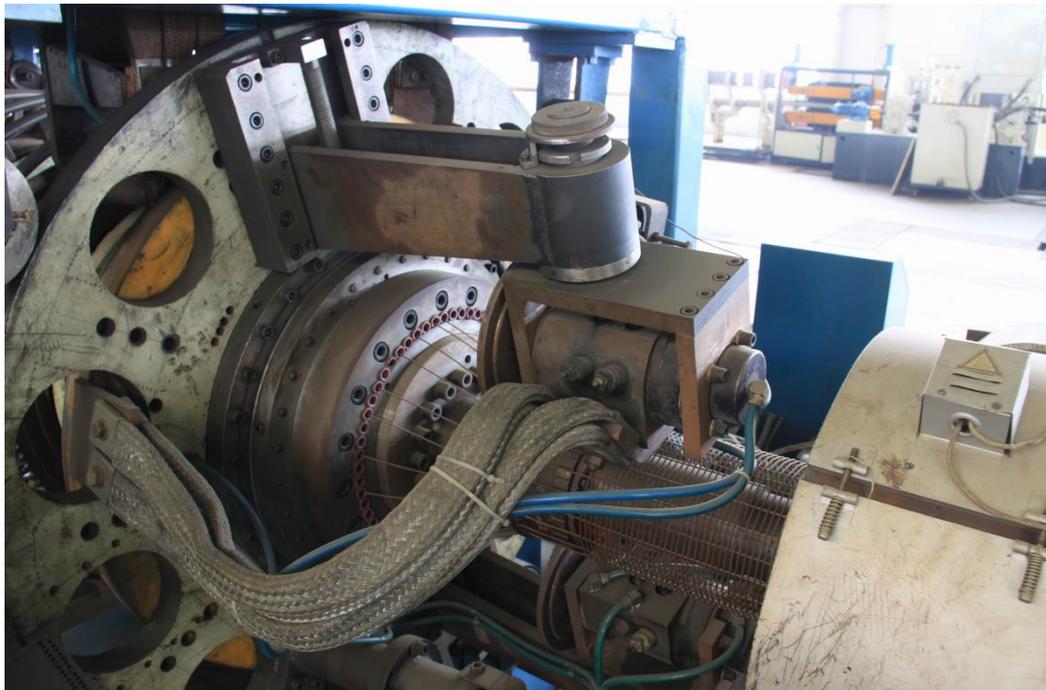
Spot welding for steel wire net (inner structure for steel-plastic pipe)
